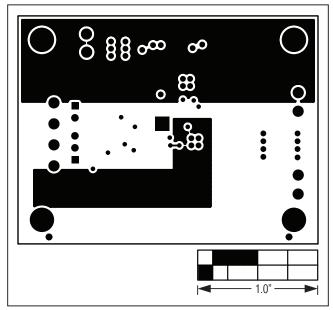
MAX16955 EV Kit PCB Layout—VCC Layer 2
